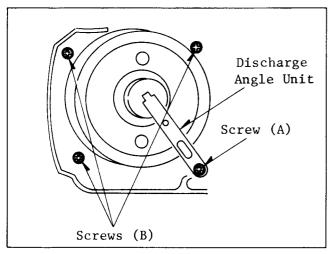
Replacement of D.D. Cylinder Unit -(1)
